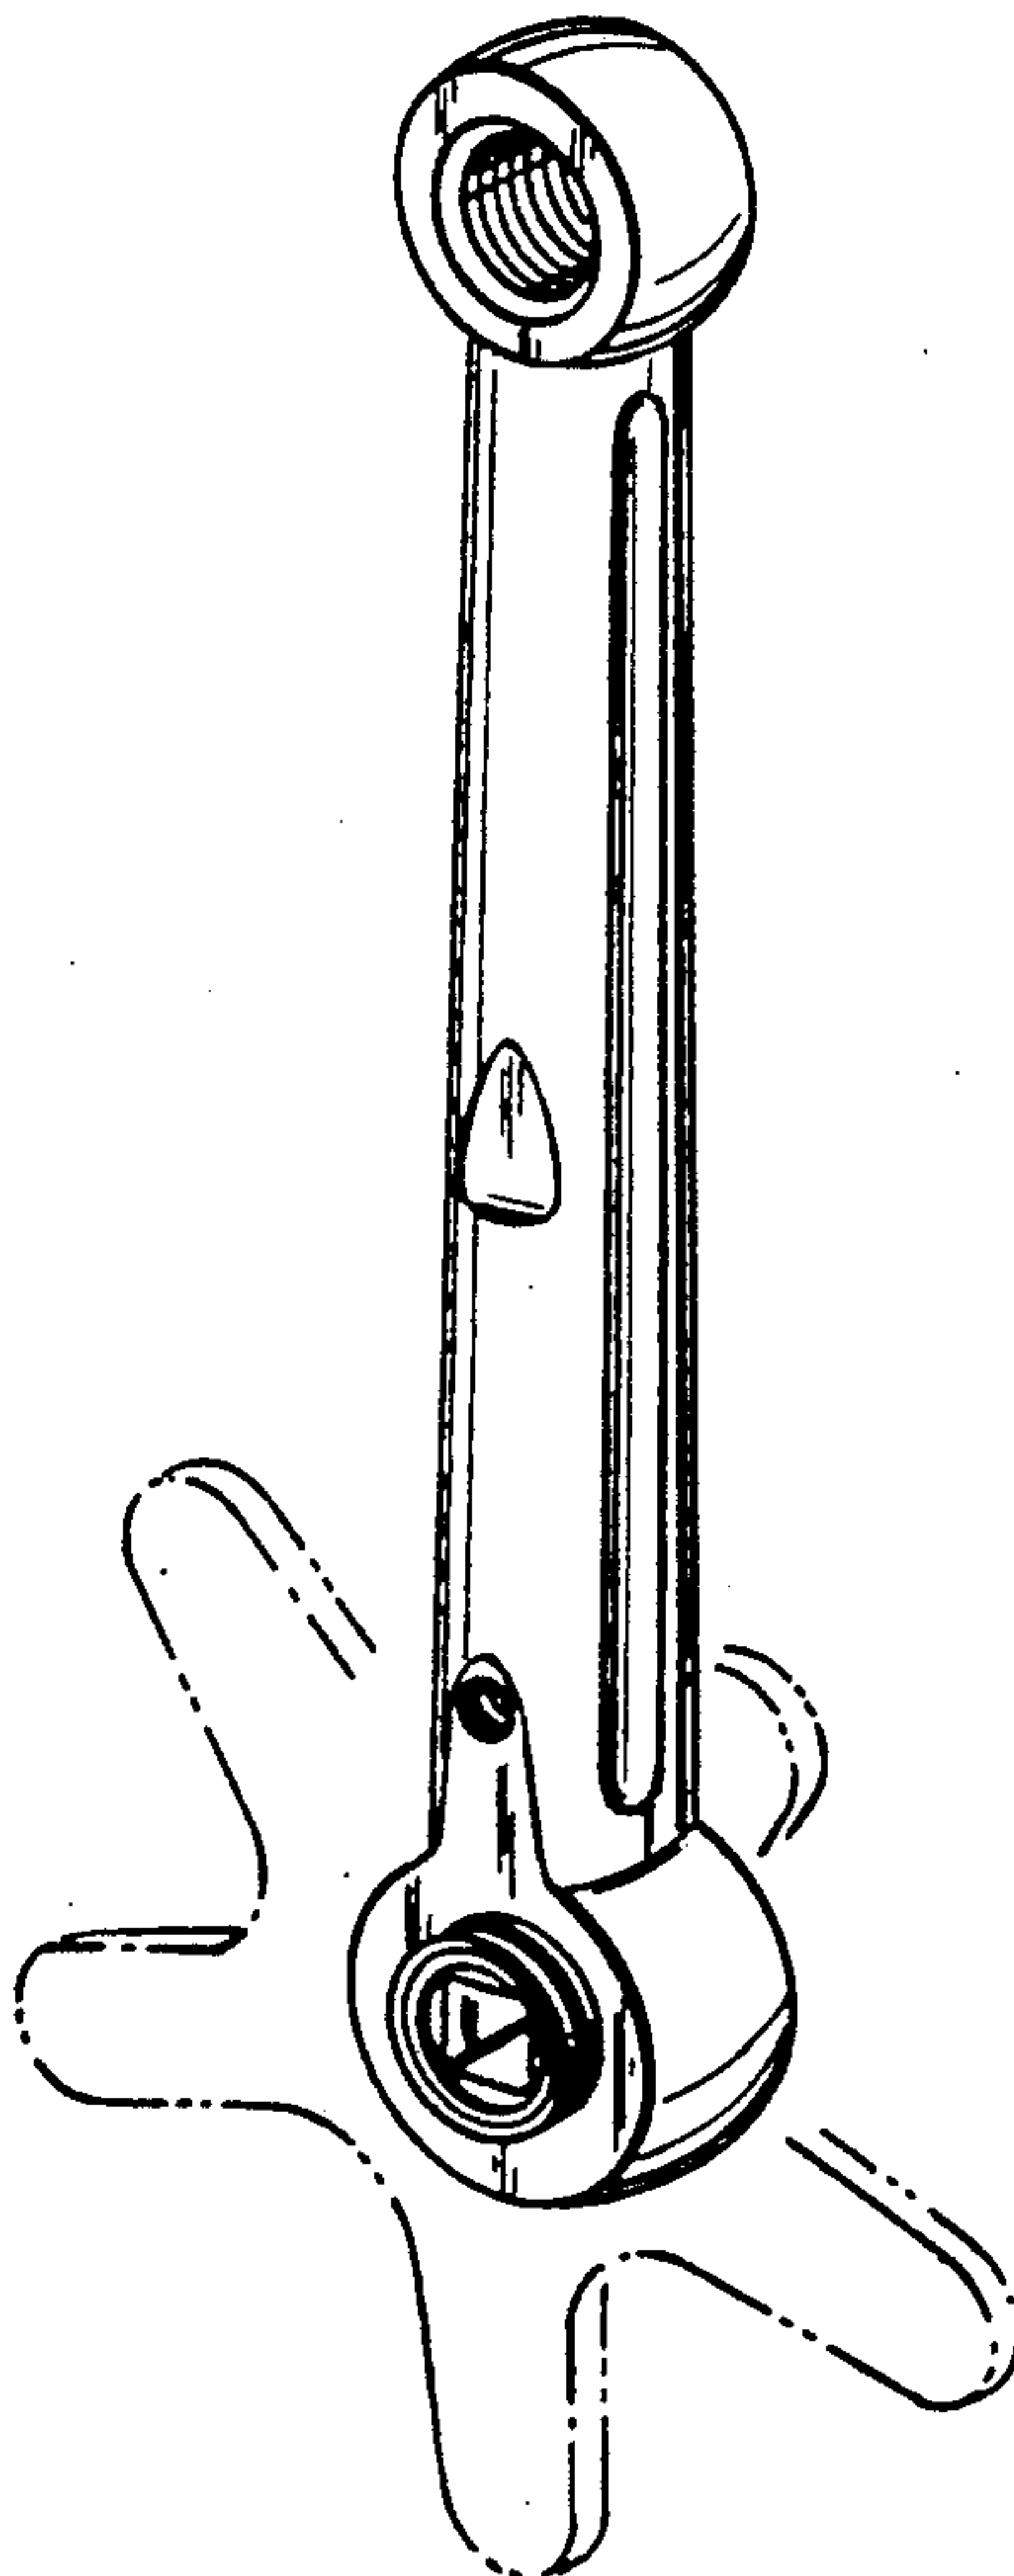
is a perspective view of a bicycle crank showing my new design;
